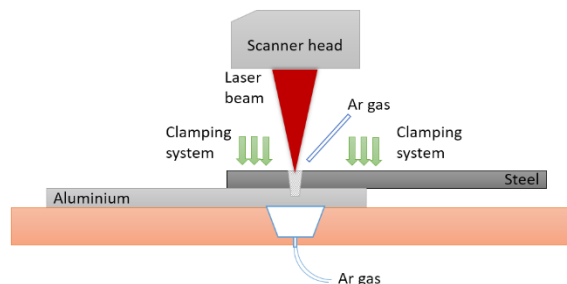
Schematic representation of the laser welding process in lap-joint configuration. 2.3 Laser welding experiments.
